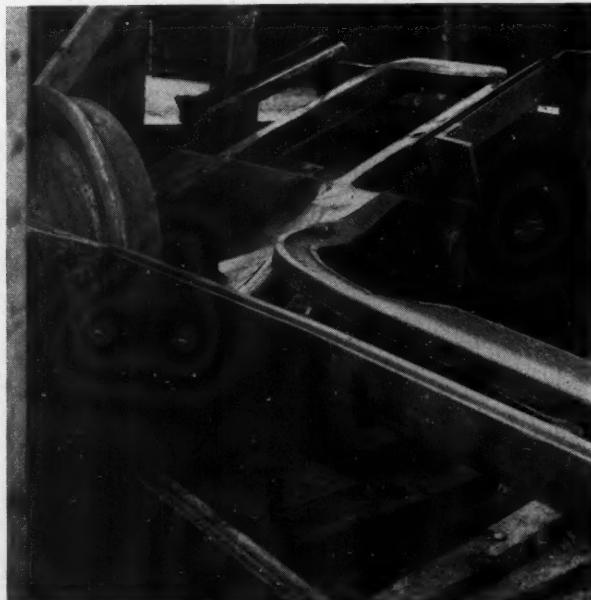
With the equipment shown here car wheels can be unloaded from a box car and moved into the shop without any lifting, conveying or hauling.
